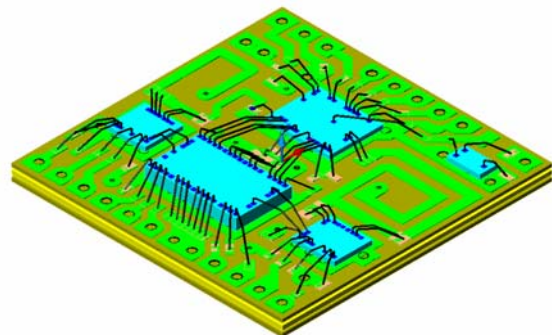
SiP MODULE AFTER WIRE BONDING
